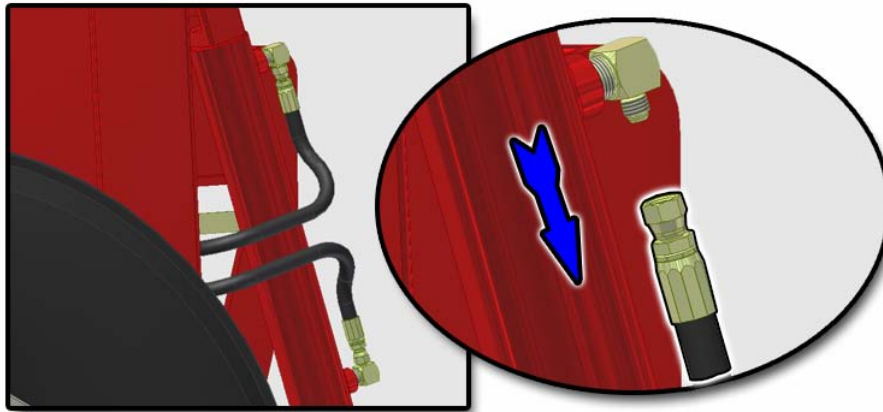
Remove Left Stabilizer Cylinder Hoses
